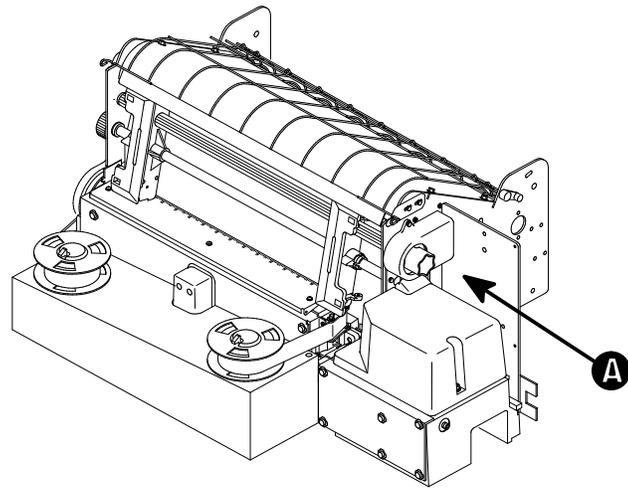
Paper Feed Belt Tension Check and Adjustment
